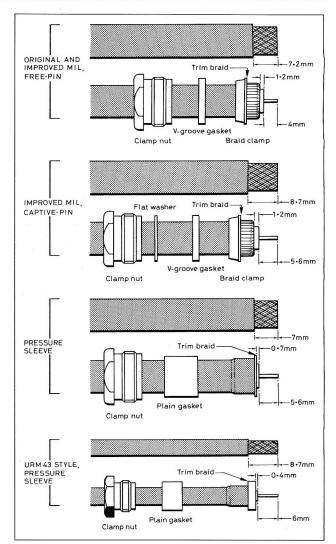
N-type dimensions, plugs, angle plugs and line sockets
